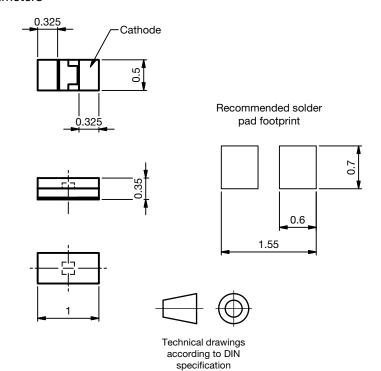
Issue: 1; 20.03.12
